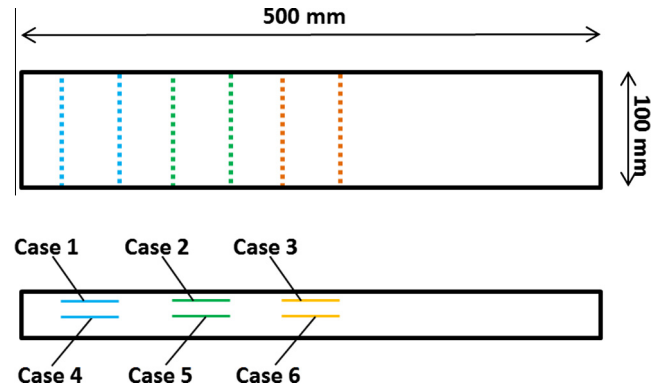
Drawing of sample showing geometrical dimensions and locations of the delaminations for the six cases.
